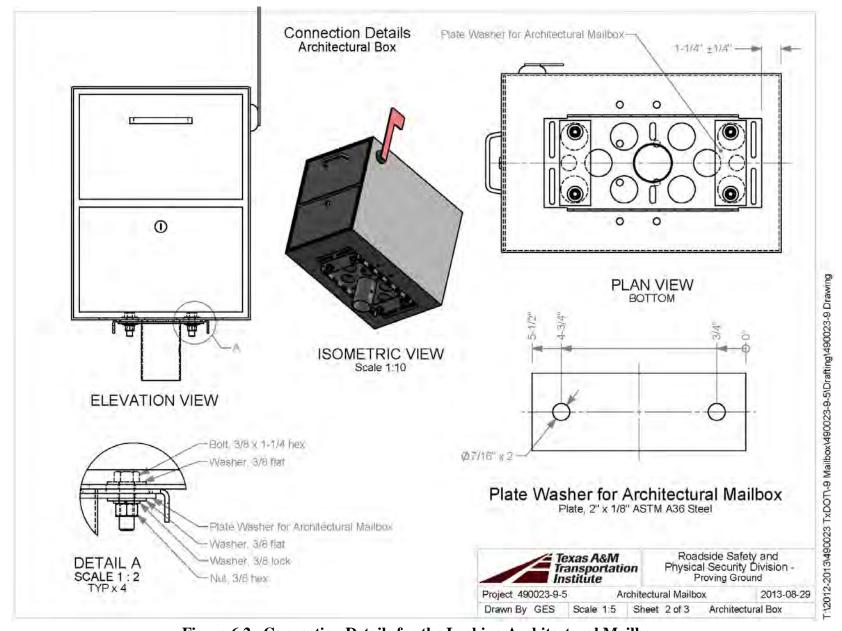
Connection Details for the Locking Architectural Mailbox.
